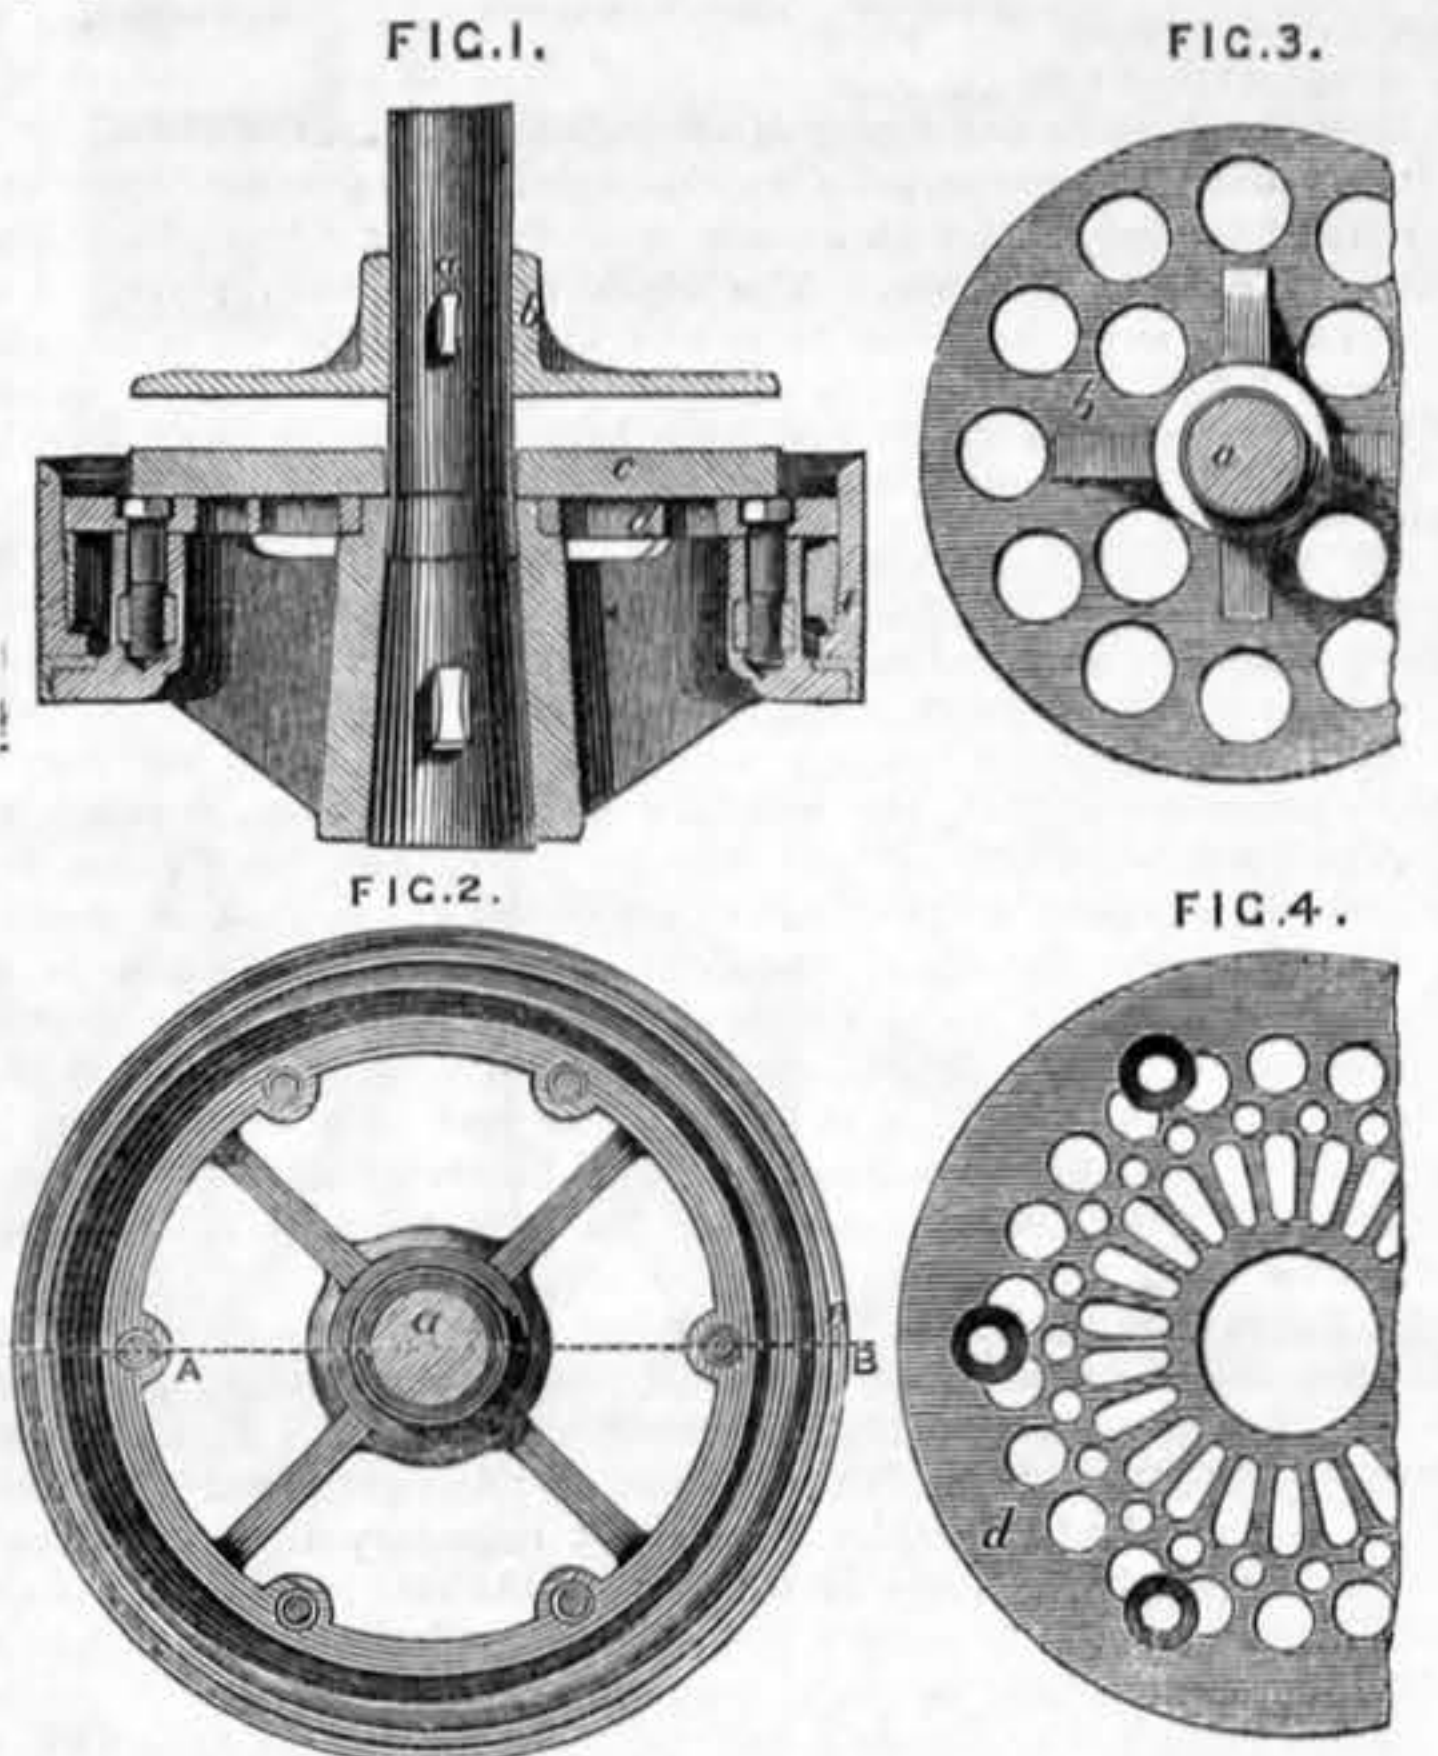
is a sectional view of the piston complete, taken through the piston at the line A, B, in Fig. 2, showing clearly the extension of the packing and the internal construction of the piston or bucket; Fig. 2 is a plan view of the piston; and Figs. 3 and 4 are respectively plan views of the valve guard plate and valve seating, both of which are perforated for the passage of the liquid. In Fig. 1, *a, a*, is the piston or bucket rod carrying the guard plate *b*, which prevents the india-rubber disc *c* rising beyond a certain limit; *d* is the valve seating; and *e* the improved packing, having its edge bevelled, and extending above the valve seating and piston cover *d*, such extension of the depth of the packing ensuring the deposit of any grit, sand, or other extraneous matter, upon the valve seating or piston cover, whence it is removed by the flow of water through the piston, and is thereby prevented from entering or working between the packing or between the packing face and the pump cylinder face, which has hitherto caused much destructive wear and tear upon both surfaces. By the use of this improved form of packing about one-third (or more) wearing surface in depth is obtained in the packing face, which renders the packing more durable than those heretofore employed.
